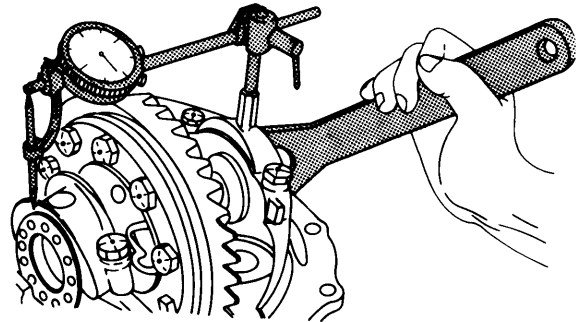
Using Dial Indicator to Adjust Side Bearing Preload
